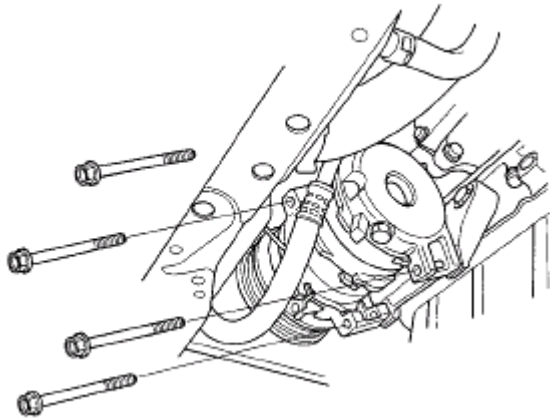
Identifying A/C Hoses And A/C Compressor Bolt
